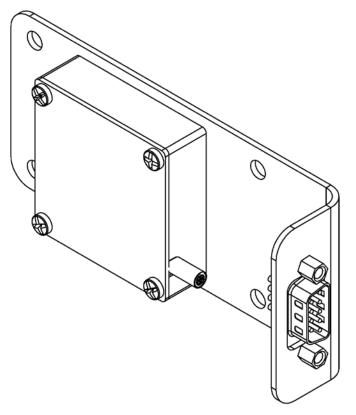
SDU Configuration Module (SCM) Assembly Drawing Part Number: 418E5733-00
